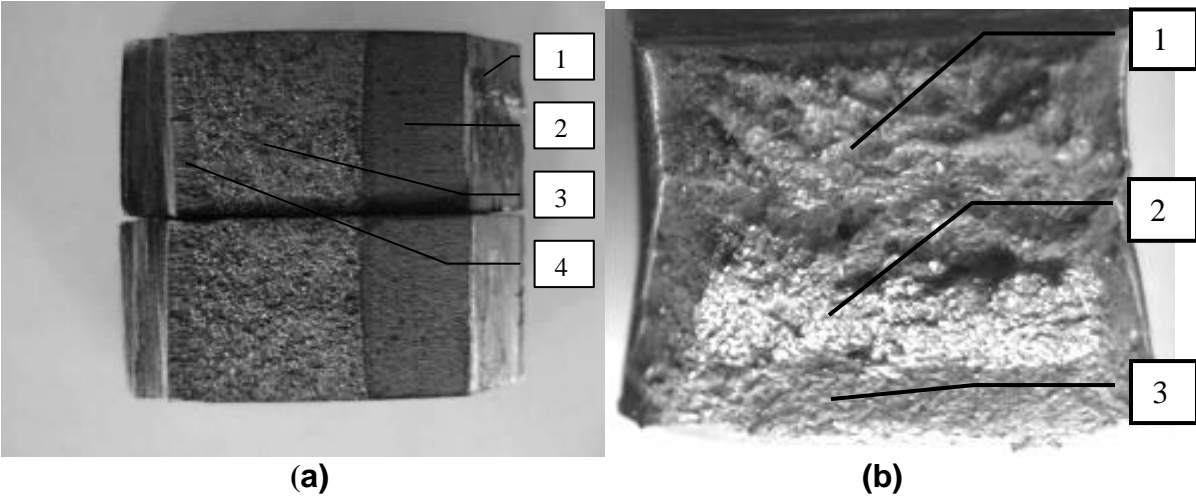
Microimages of fracture in (a) disk-shaped specimen and (b) Charpy specimen.
